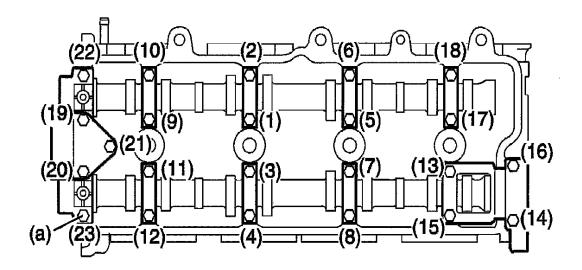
Tightening Camshaft Housing Bolts In Sequence Courtesy of SUZUKI OF AMERICA CORP.
